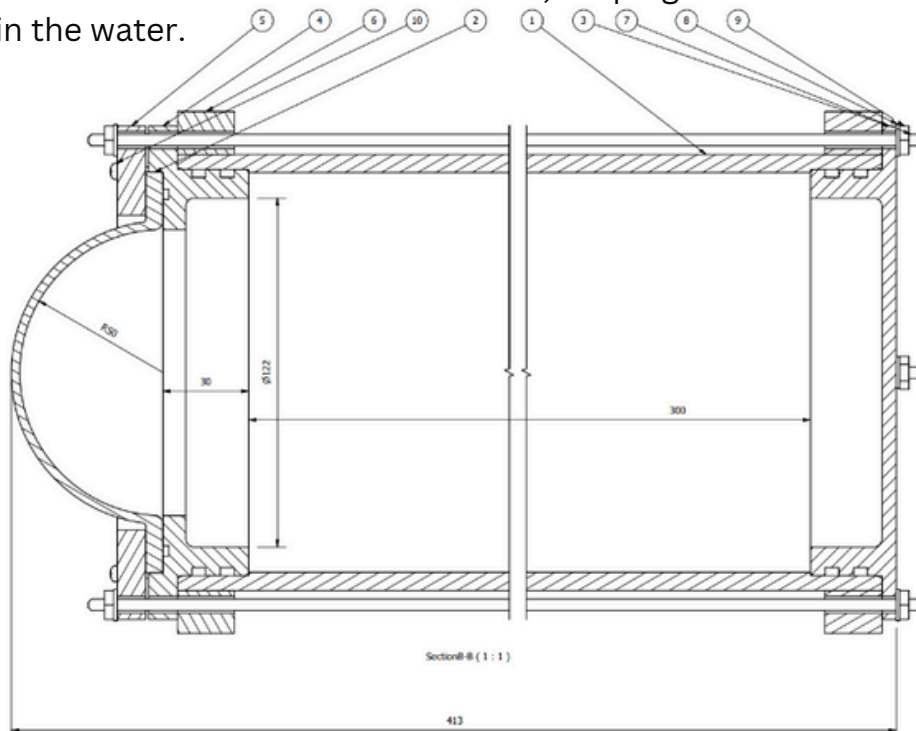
Sectional View of the ROV Pressure Hull Assembly
